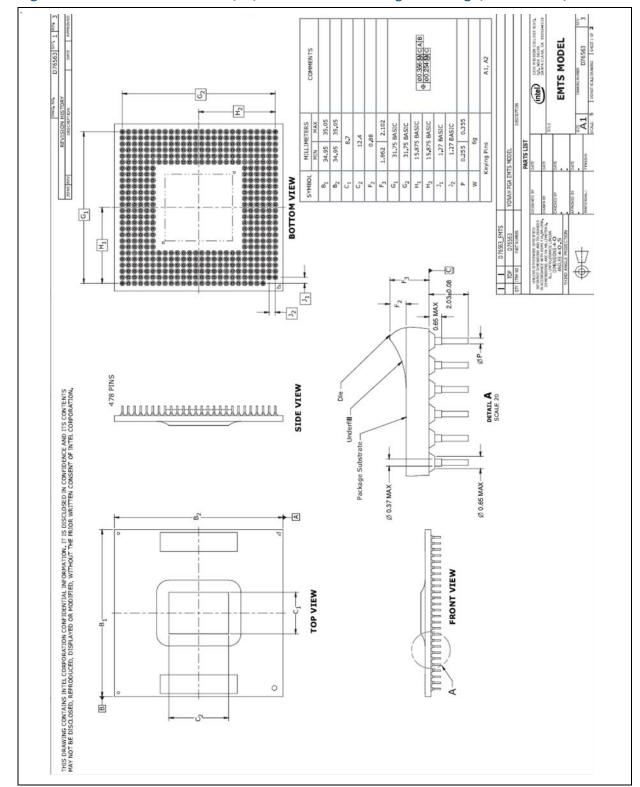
1-MB on 6-MB Die (SV) Micro-FCPGA Package Drawing (Sheet 1 of 2)
